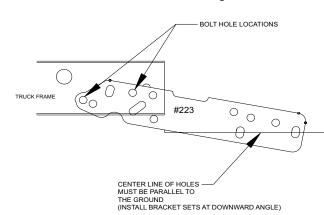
(driver side view) 1967-72 F/S TRUCK (34 INCH FRAME) FIGURE 2 (driver side view) 1967-72 F/S TRUCK (34 INCH FRAME)
